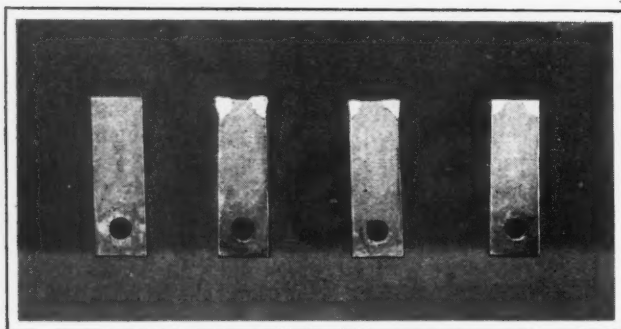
Plain Steel Hammer Part and Stelliteed Parts before and after grinding
